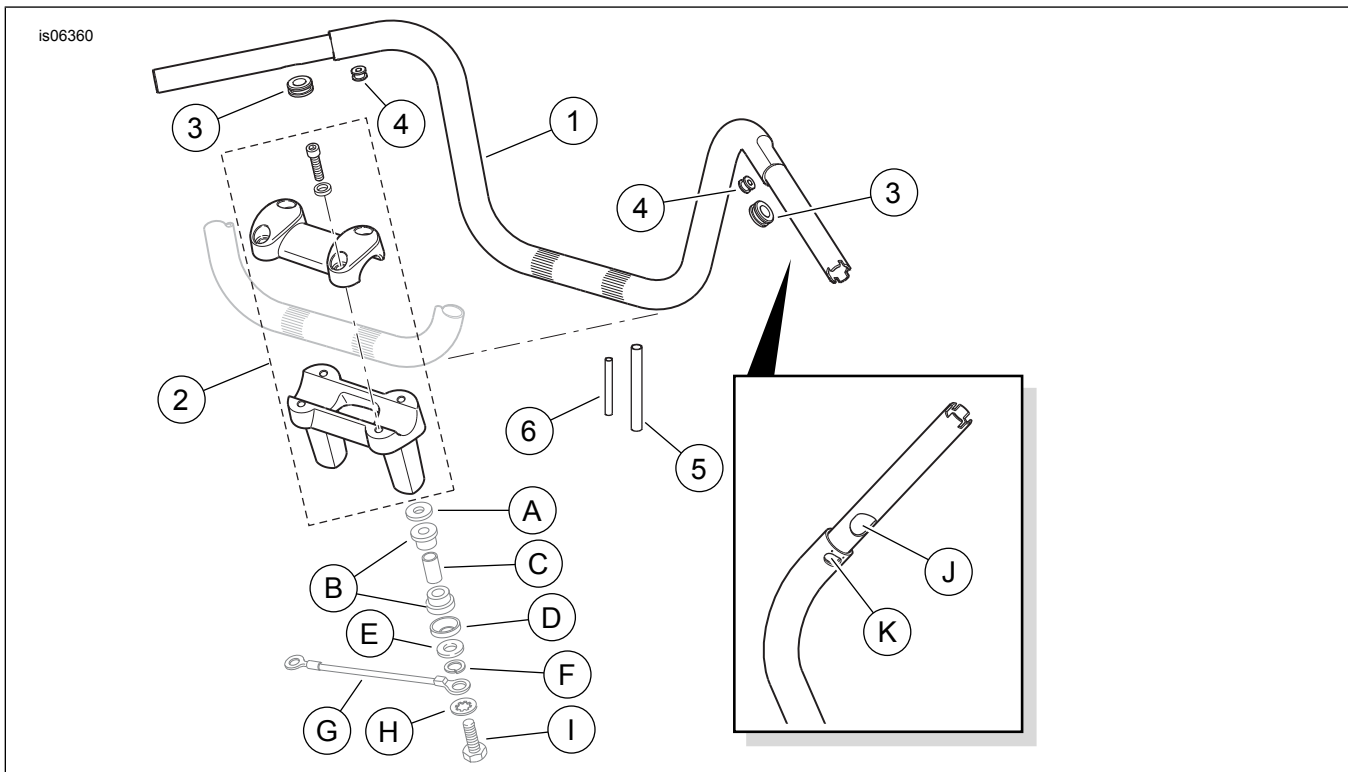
Service Parts: Fat Ape and Fat Mini-Ape Handlebar Kits
